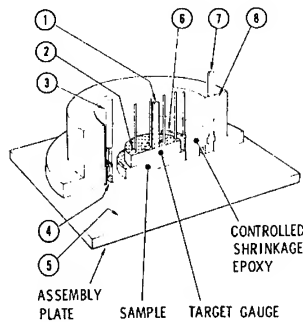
Cutaway view of sample target gauge assembly mounted on the flat assembly plate. The entire unit is held in place against the plate and encapsulated with epoxy potting. The quartz crystal and target material are held in intimate surface contact during epoxy encapsulation and cure procedure. After the epoxy has cured, the entire target assembly is removed from the plate. The individual parts shown are: (1) Nylon Rod, used to press target gauge and sample against assembly plate. Numerous rods may be used for thinner gauges as well as nylon disks for gauges of thinner than 0.15 inches. (2) Indium Soldered Lead Wires. These short wires are later connected to coaxial cables and load resistors after potting. (3) Cable, Raychem Corp. type 22-174, 1 ft. Conducts impactor gauge signal from contact subtending a 95° arc to air dielectric cable. (4) 95° Center and Ground Contacts. Couples signal from one of four flying contacts on projectile gauge. (5) Mold Release surface coating. Miller-Stephenson Chemical Co., type MS122. (6) Signal Ground Ring. Provides connection to negative quartz surfaces. Prevents shock reverberation from causing contact bounce. (7) Trigger Cable and Connector. (8) Flanged Lucite Container. Machines easily for tilt control and contains epoxy during cure.
